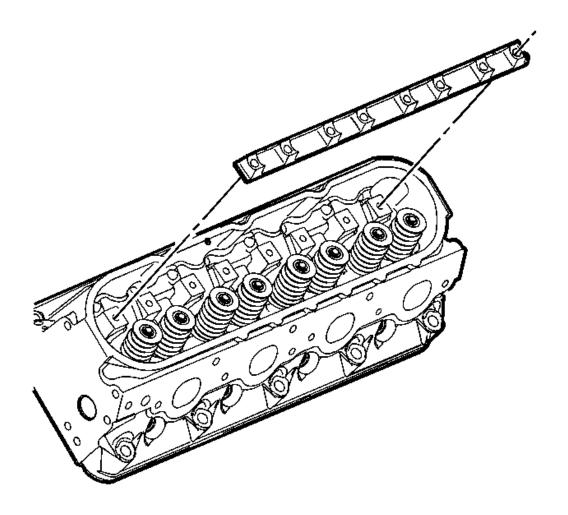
View Of Valve Rocker Arm Pivot Support Courtesy of GENERAL MOTORS CORP.
